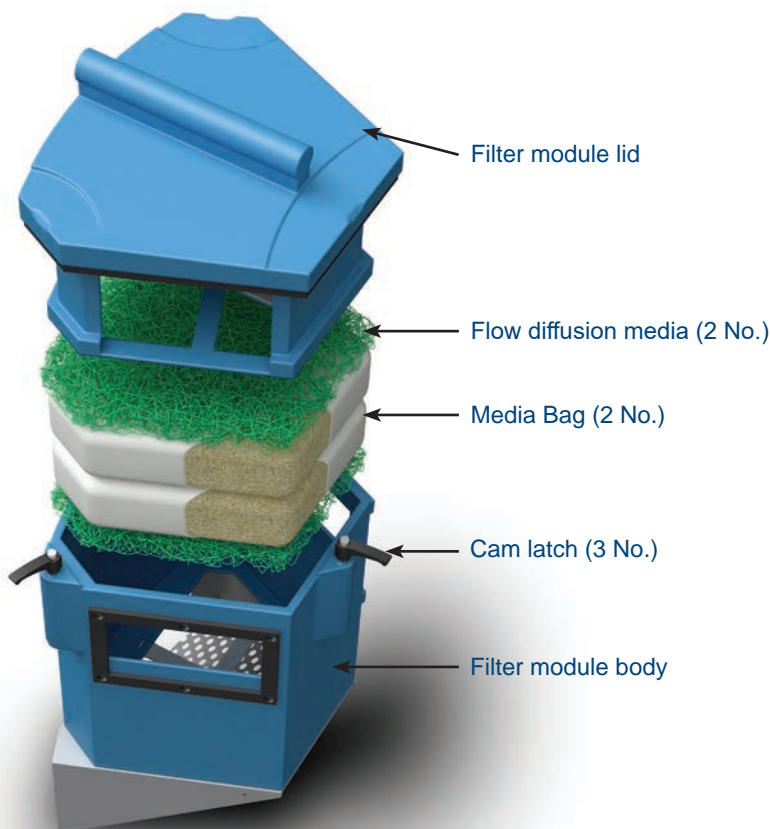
Exploded view of an Up-Flo™ Filter Module.
